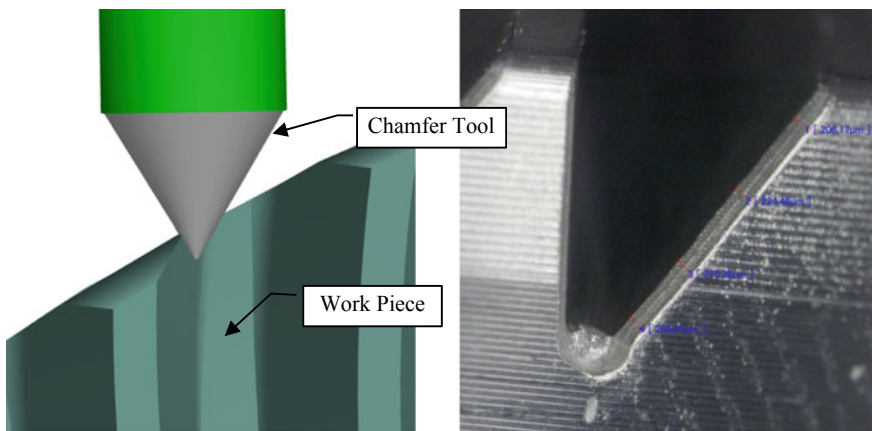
Heel chamfering with Chamfer Tool—smooth chamfer edge
